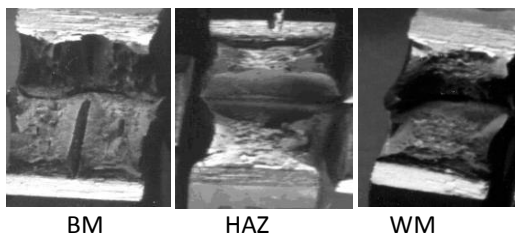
Typical fracture surfaces of BM, HAZ and WM
